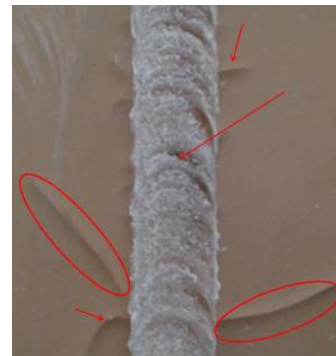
The inappropriate welded sheets in 24 mm/min travel speed
